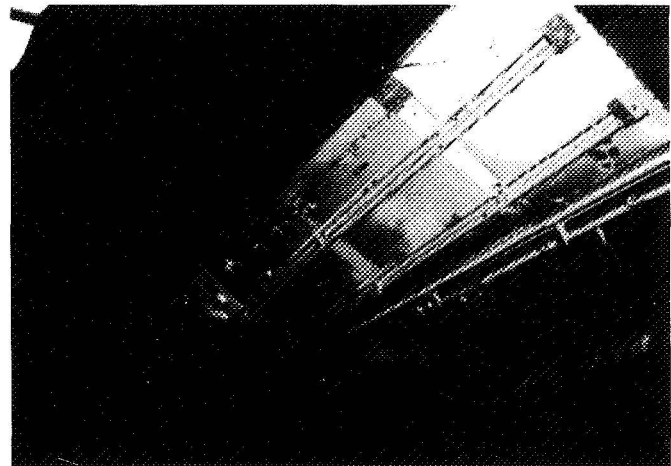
Final failure of multiple site damage test on panel 127-A lap joint.
